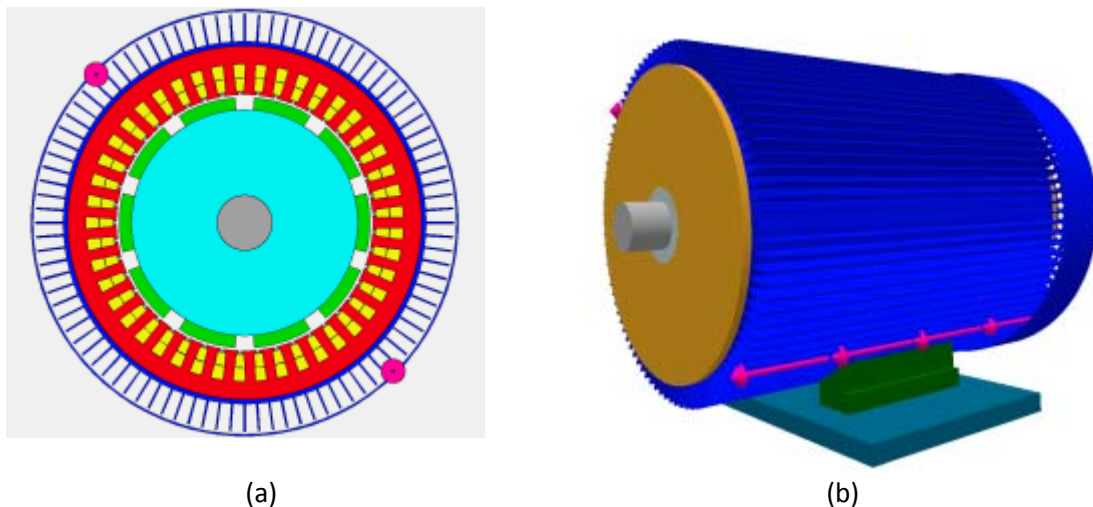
(a) Cross sectional view of designed machine and the considered frame for the PMSM. (b) 3D view of the modeled machine with Motor-CAD.
